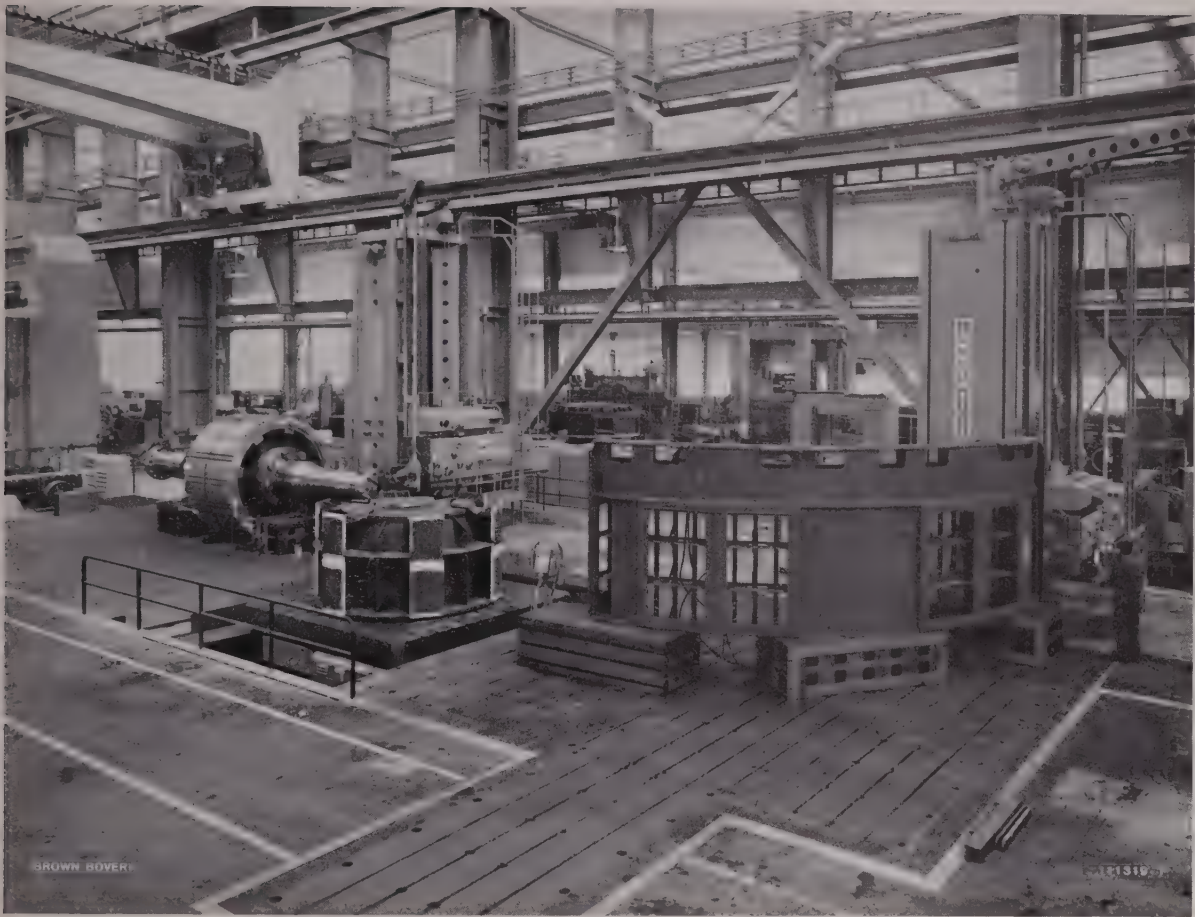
Milling and boring machines (Made by Innocenti, Milan, to the design of C.W. Berthiez, Paris)
